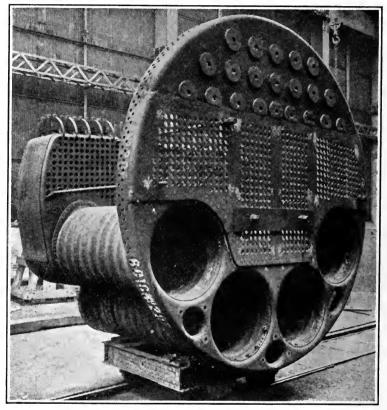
Scotch boiler with waste type superheater and Howden air heater.
